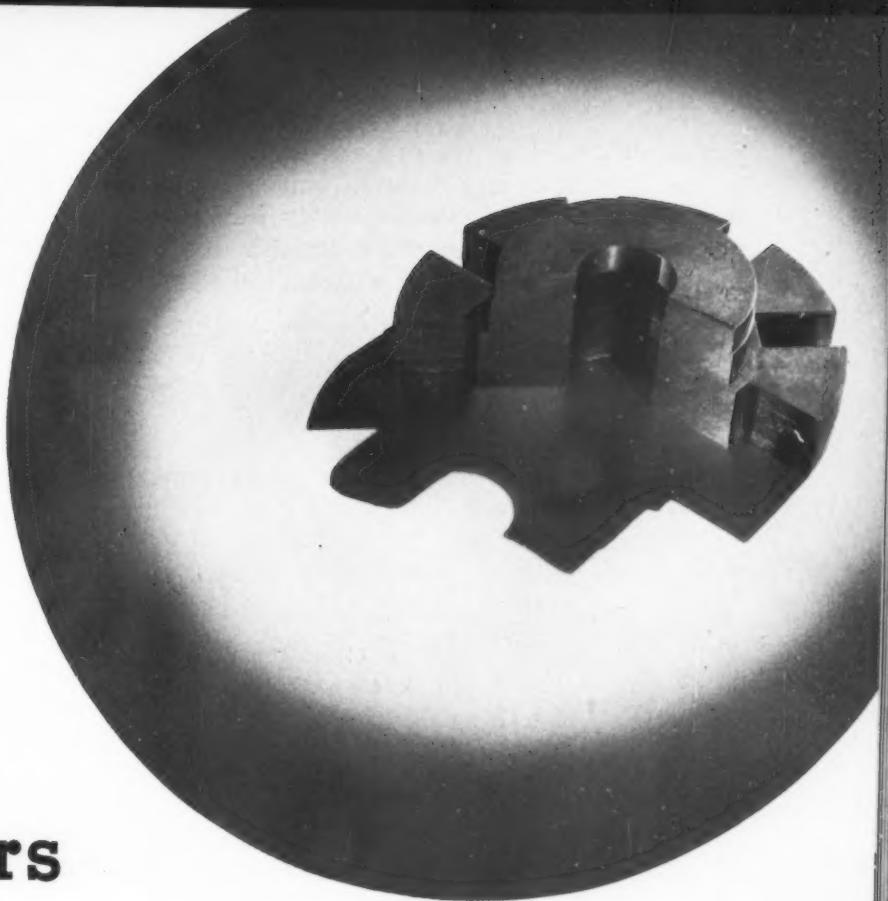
Cutaway view of large coupling made from stampings. Parts were held to fine tolerance, eliminating machining
